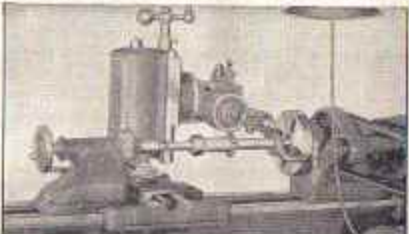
Gears Up to 4 1/2-inch Diameter Can Be Cut with This Gear Cutter on "Workshop" Lathe.
